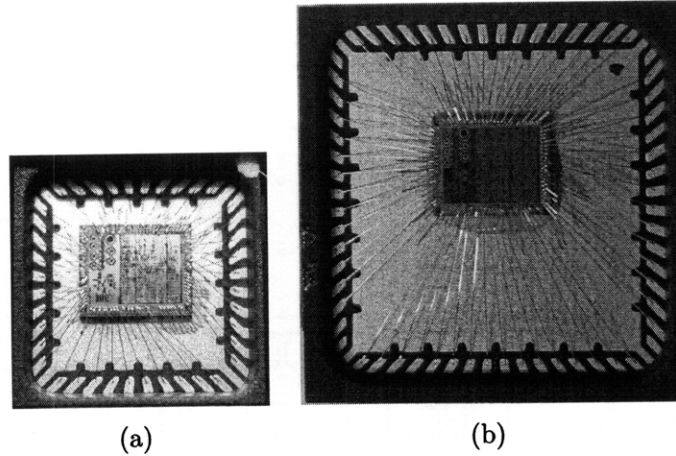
Bare die packaged in (a) a 40-pin QFN package and (b) a 64-pin QFN package. The 40-pin QFN package is 6mm x 6mm and the 64-pin QFN package is 9mm x 9mm. The two photos are equally scaled.
